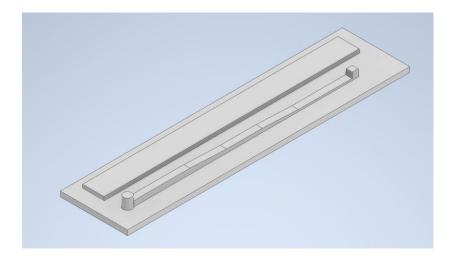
Drag pattern layout including the sprue well, stepped runner, and trap.
